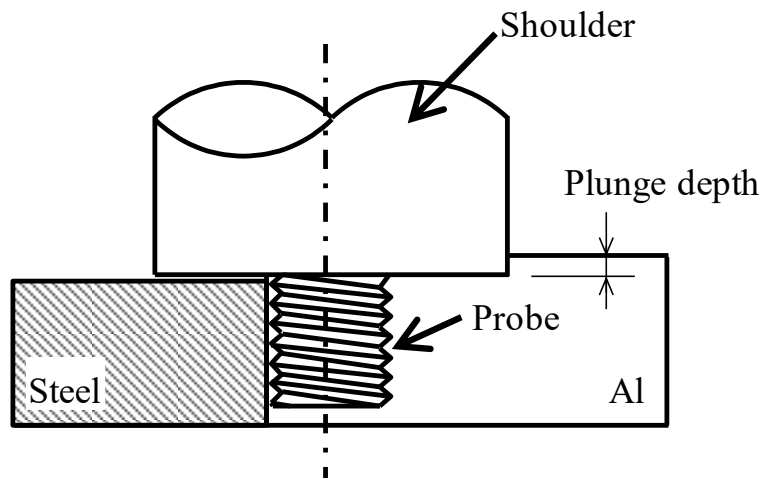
Schematic illustration of Al-Steel FSW joint in which tool is inserted into Al side.
